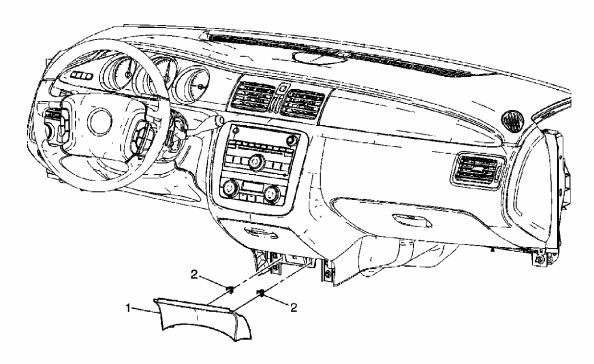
Identifying Ashtray Side Panel Courtesy of GENERAL MOTORS CORP.
